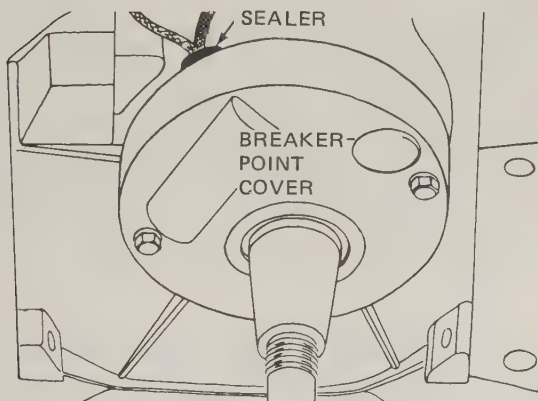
The breaker-point cover, also called the dust cover. (Briggs & Stratton Corporation)
